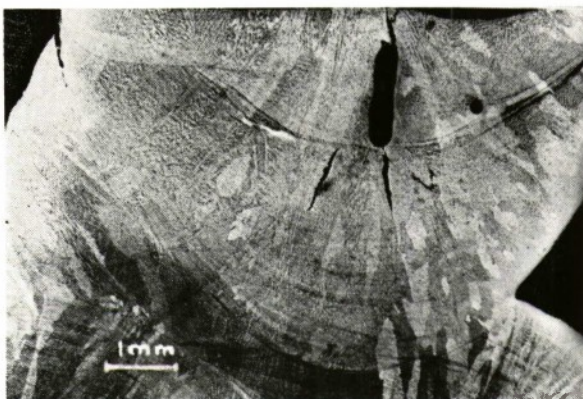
(b). Example of cracking in the root run of weld. Sectional view.
